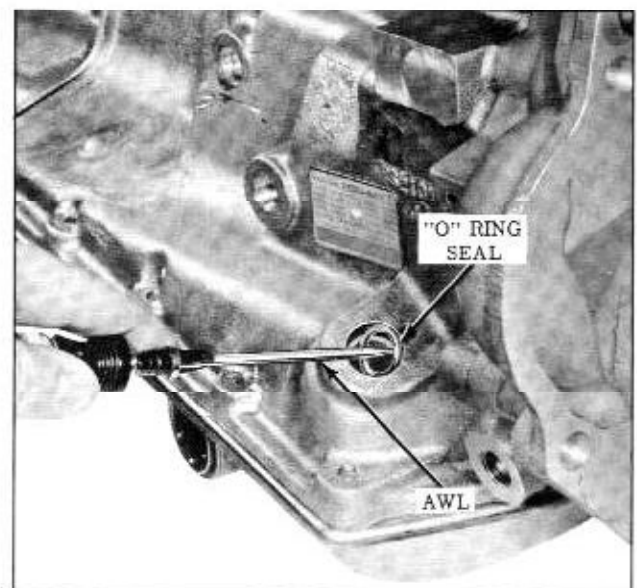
Removing Filler Pipe "O" Ring Seal
